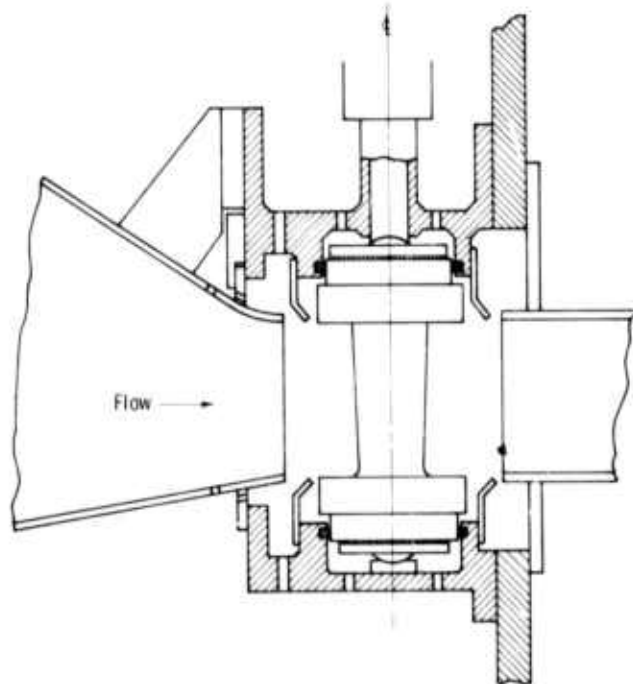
Ceramic Stator Vane Assembly for Static Rig Testing
